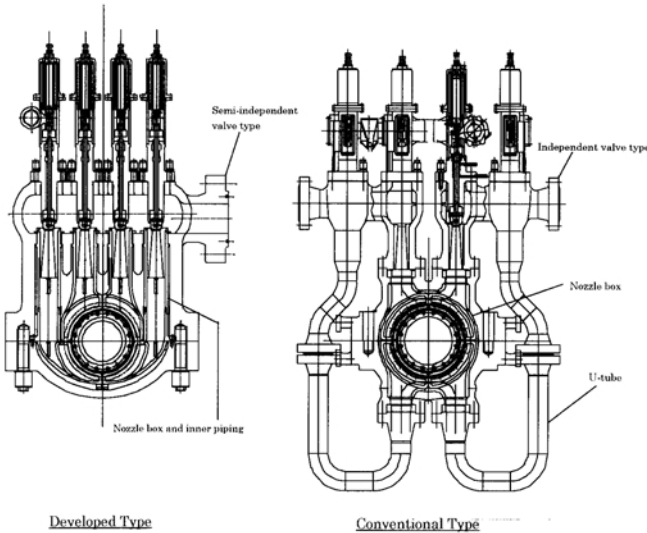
Sectional Drawing of Governing Valve for Developed and Conventional Turbine.
